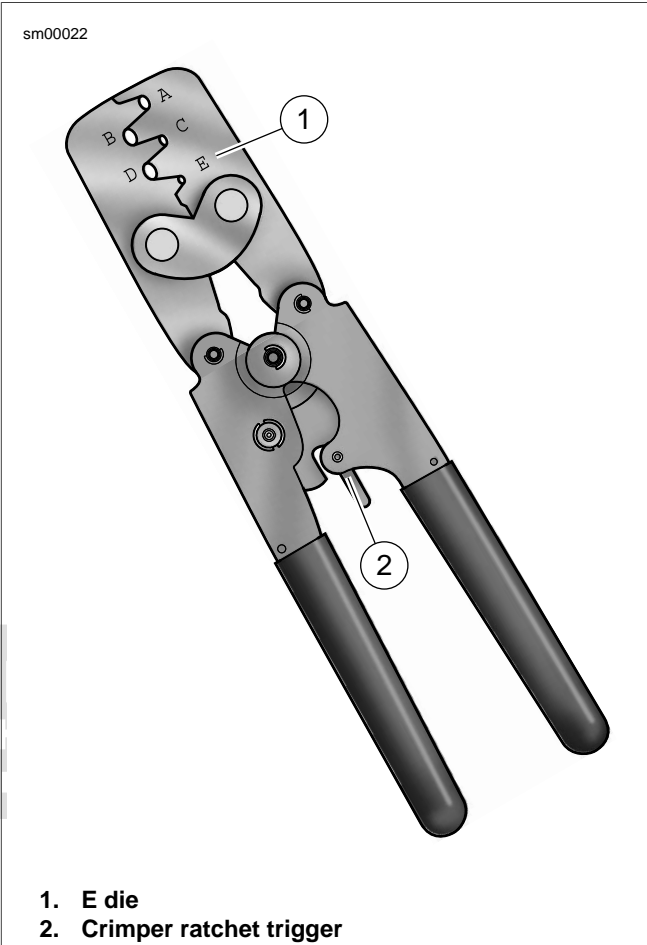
Packard Terminal Crimper (HD-38125-7)
